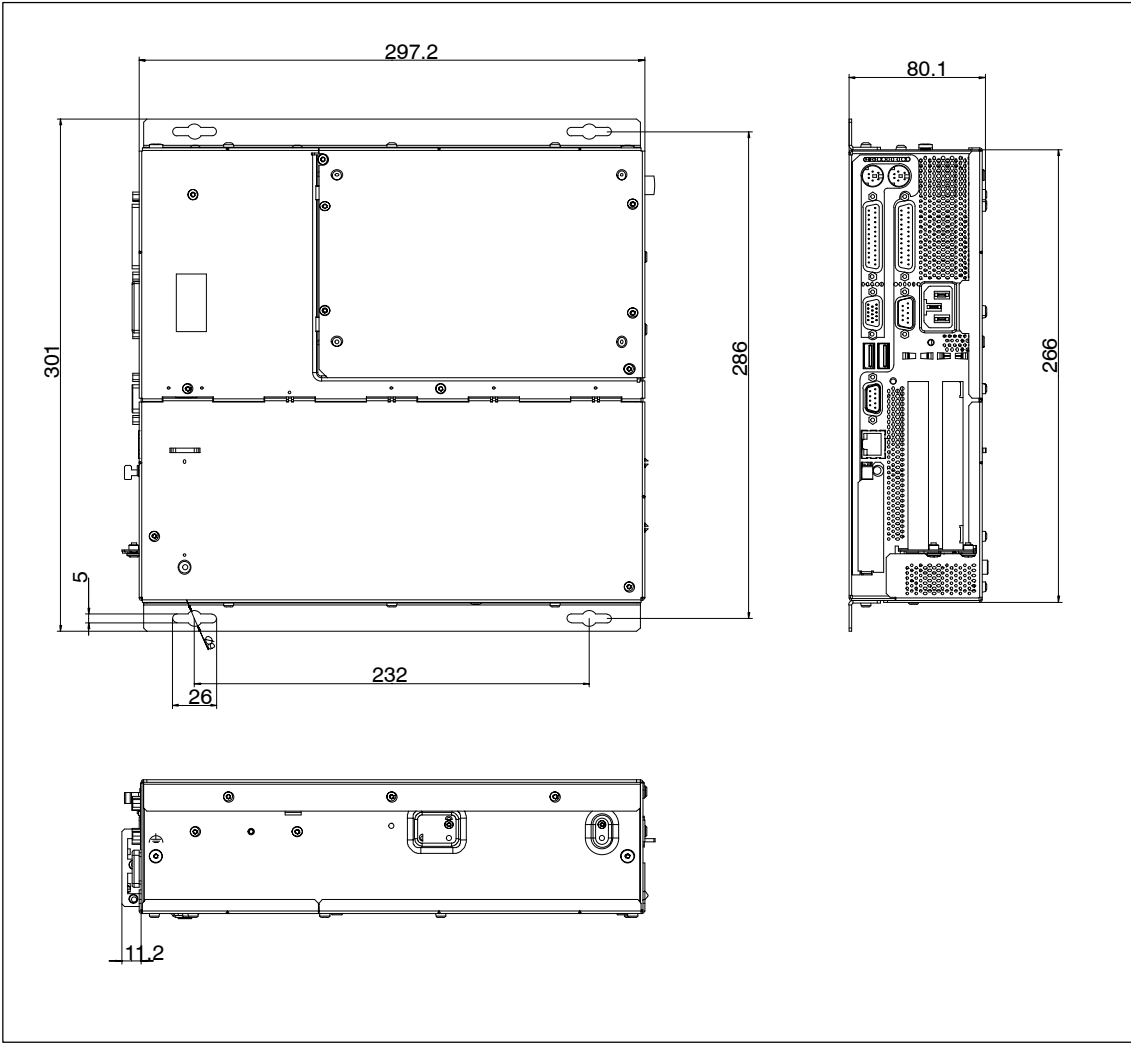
Dimension Drawings for Fitting in Control Panel with Installation Angle (Device without CD ROM Drive)
